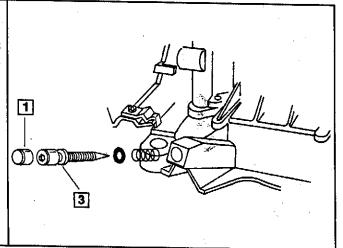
INSTALLATION OF DISCHARGE NOZZLE SCREWS
